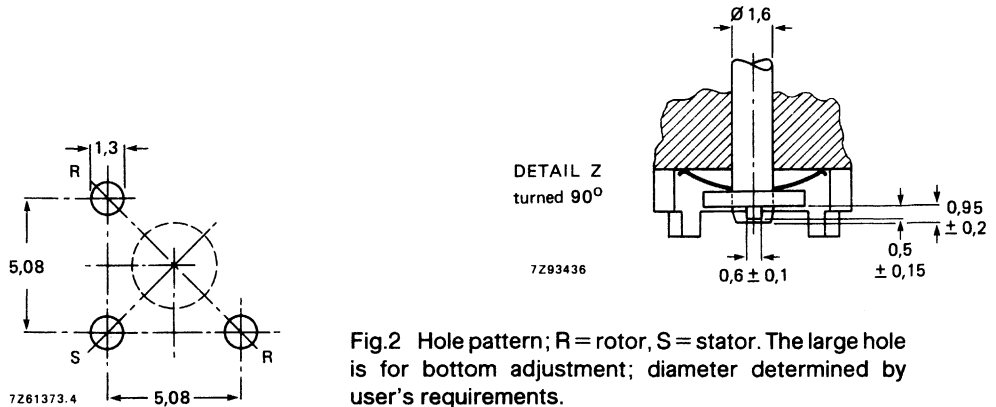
Hole pattern; R = rotor, S = stator. The large hole is for bottom adjustment; diameter determined by user's requirements.
